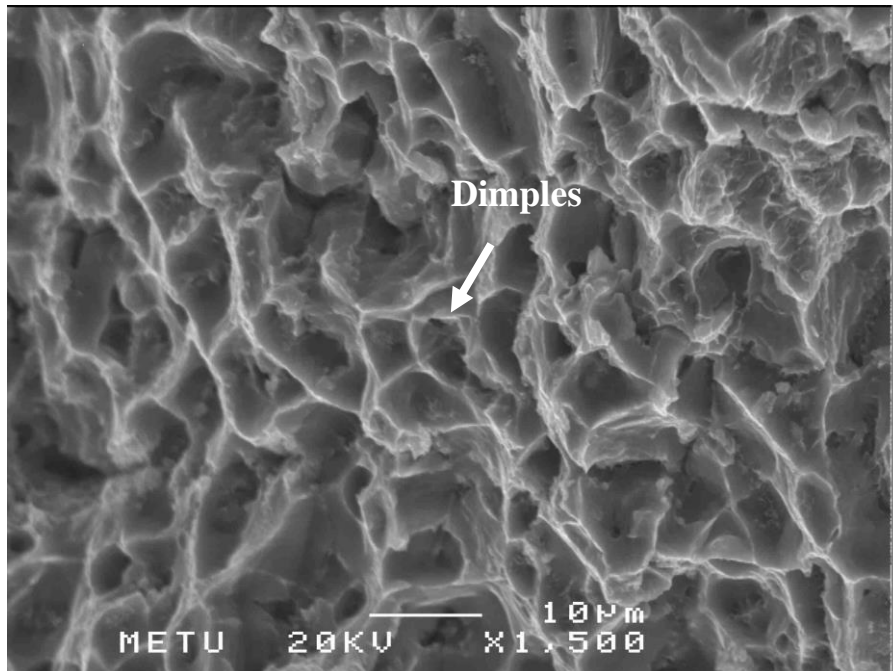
45V.1. The section for weld metal from fracture surface. Keller's reagent.
